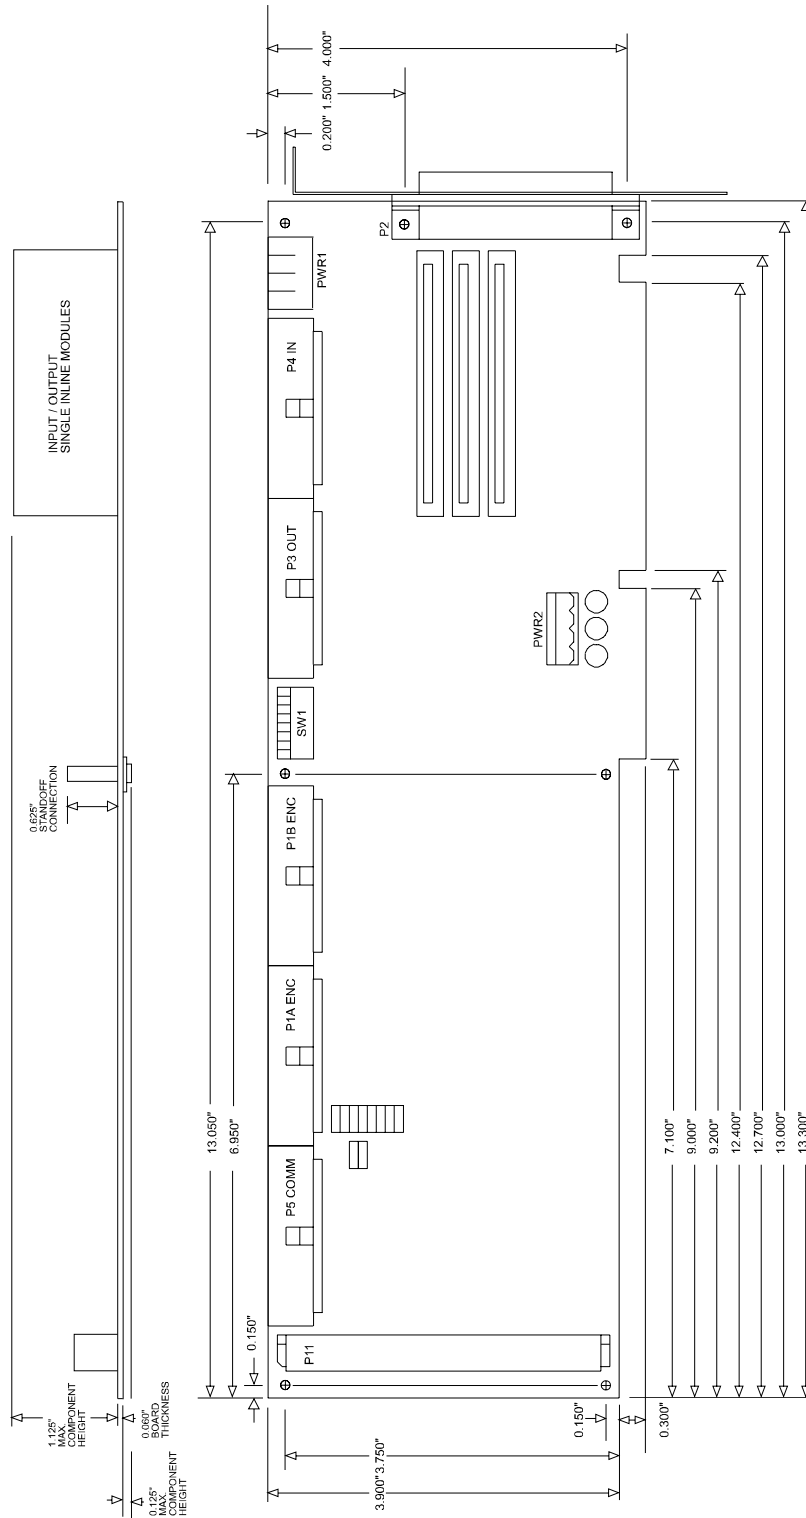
ACR8000 Motherboard Mechanical Dimensions
